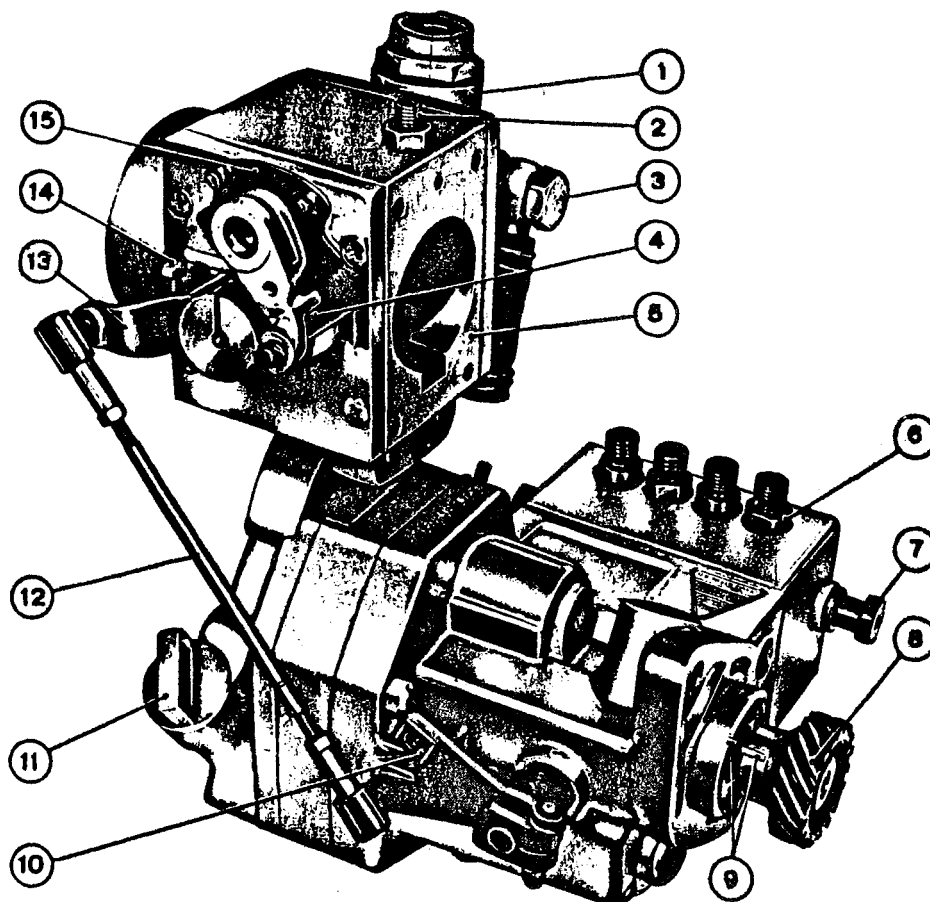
Injection Pump and Butterfly Valve Housing Assy.
